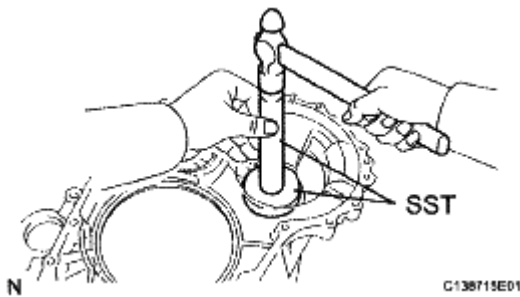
Installing Front Differential Case Front Tapered Roller Bearing Outer Race And Transaxle Housing
